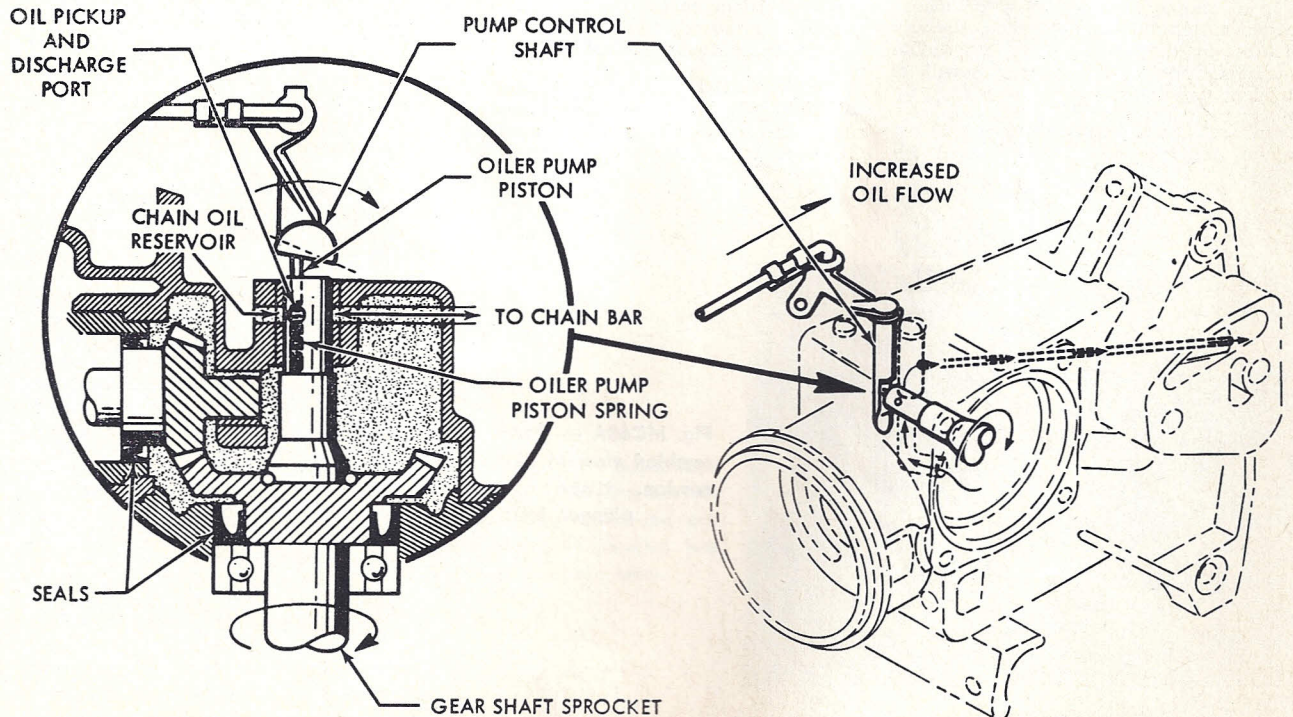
Schematic view of automatic chain oiler pump operation.
